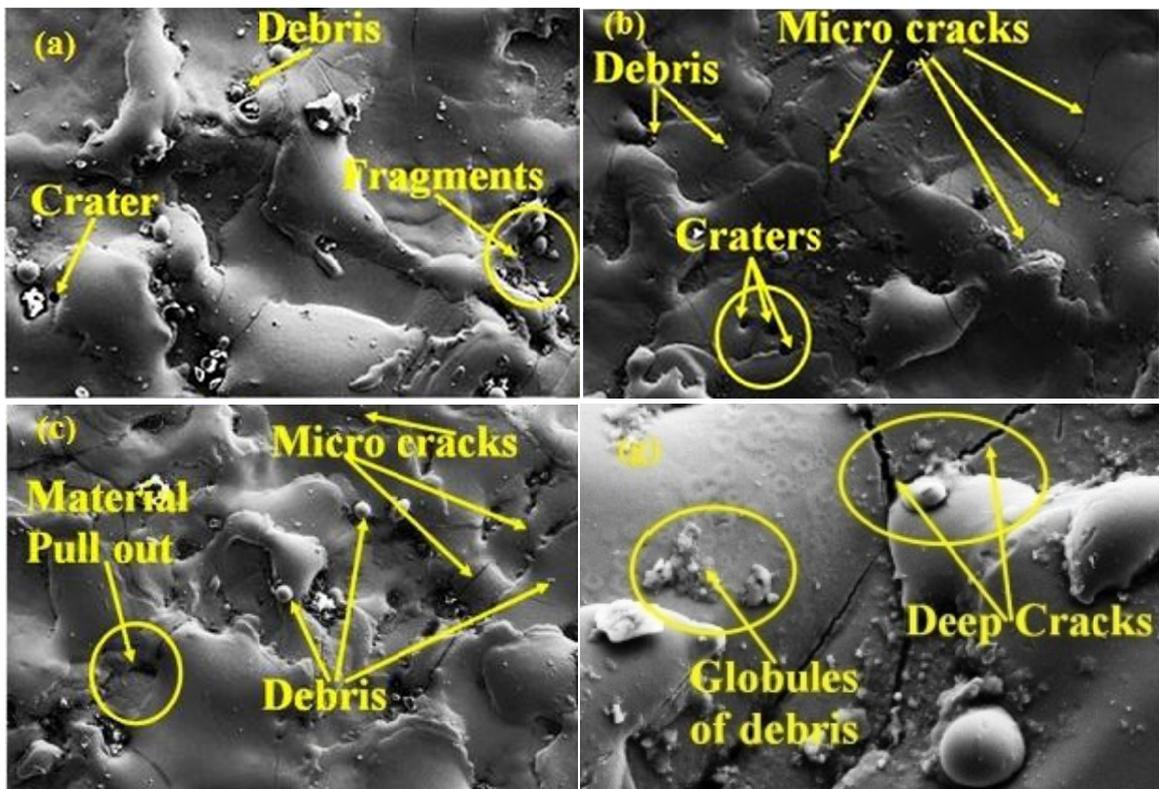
SEM graphs of Inconel 800 specimen machined by PMEDM
